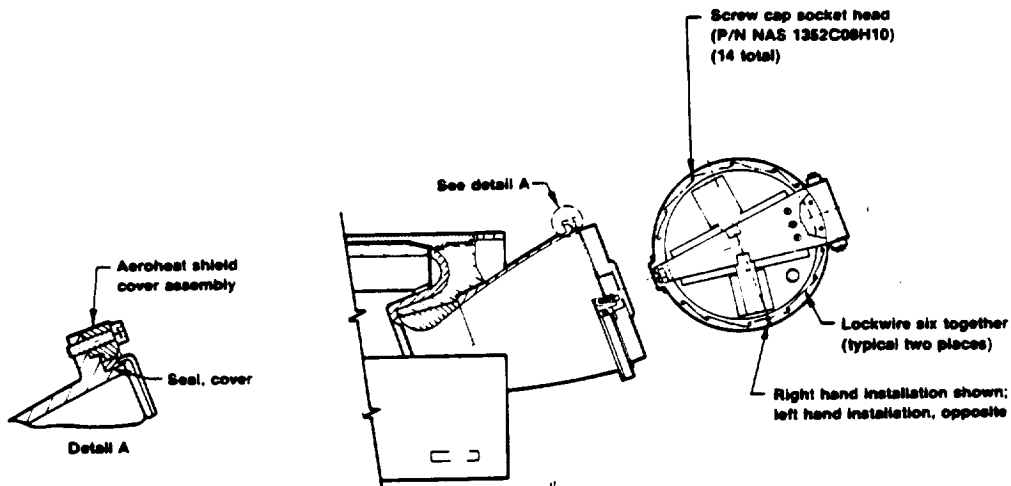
Hinged Cover Assembled to BSM Exit Cone.
